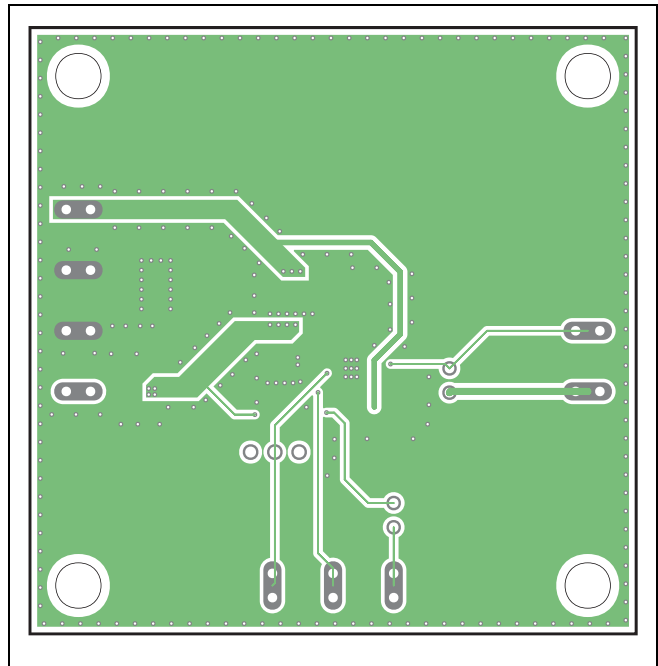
MAX17760AAEVKIT# PCB Layout—Layer 3
